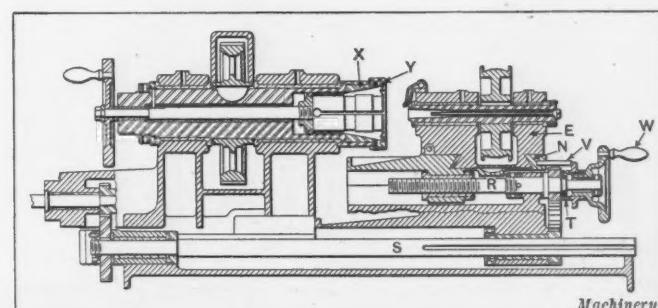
Sectional View, showing Important Features of Machine illustrated in Fig. 15
